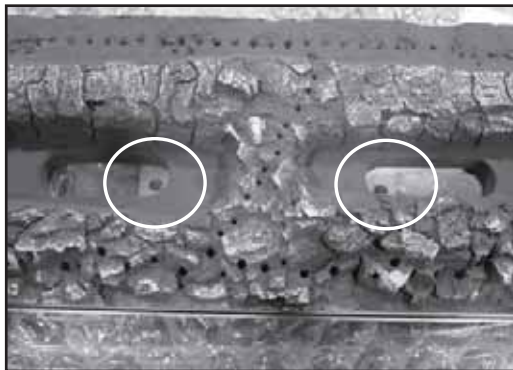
Using the #2 Phillips screwdriver remove the two (2) 1/4" x 20 screws securing the burner as indicated. Lift burner out of firebox.
